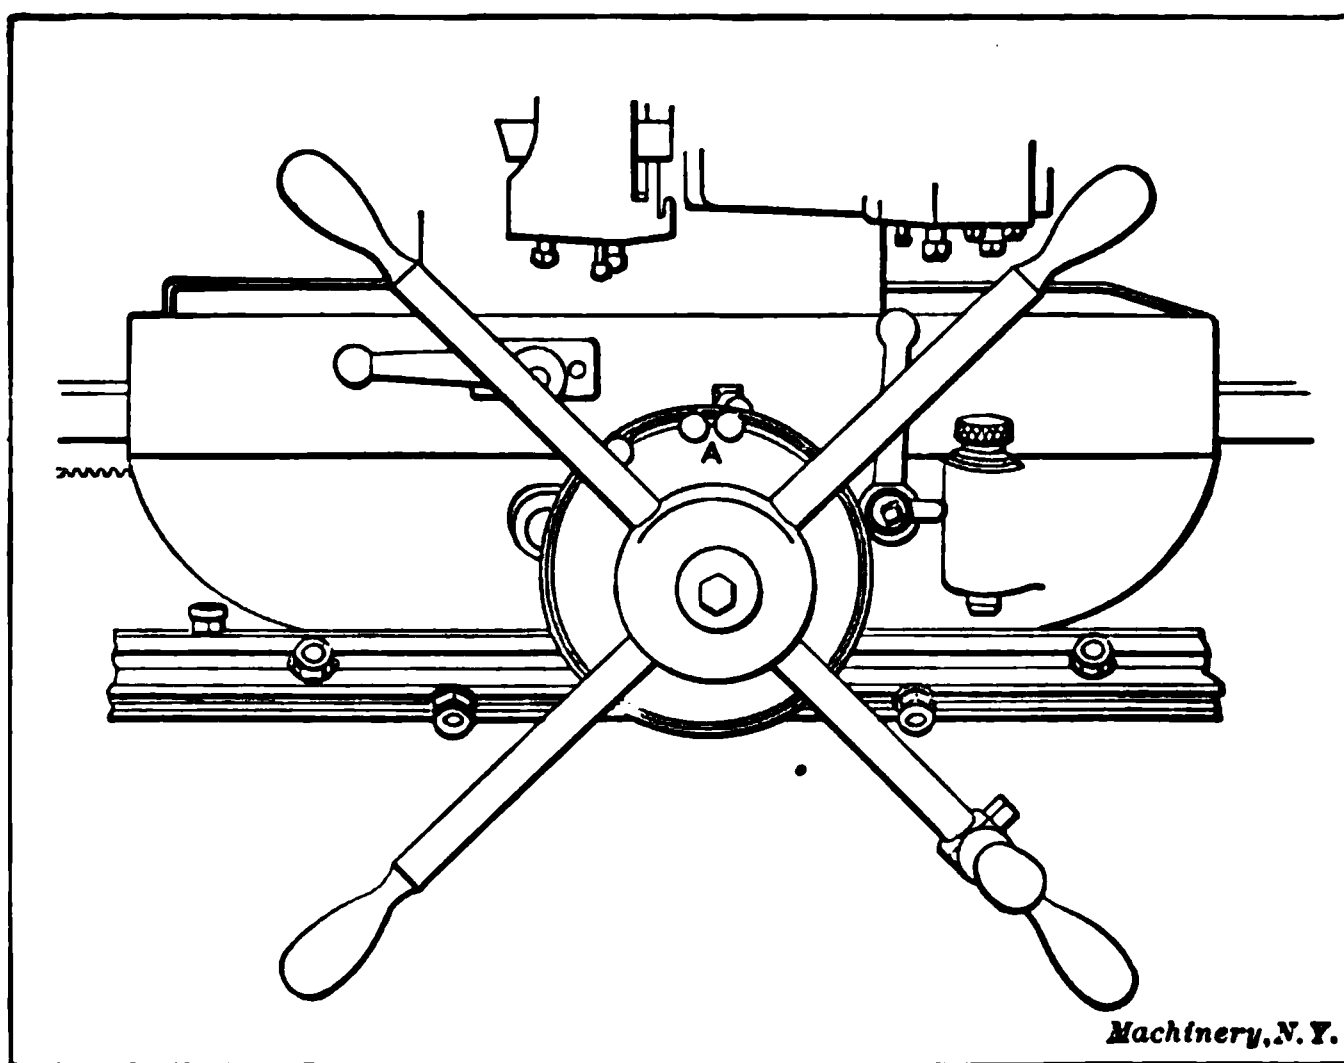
Rotating Stop-bar and Accurate Indicator used on the Alfred Herbert Hexagon Turret Lathe
